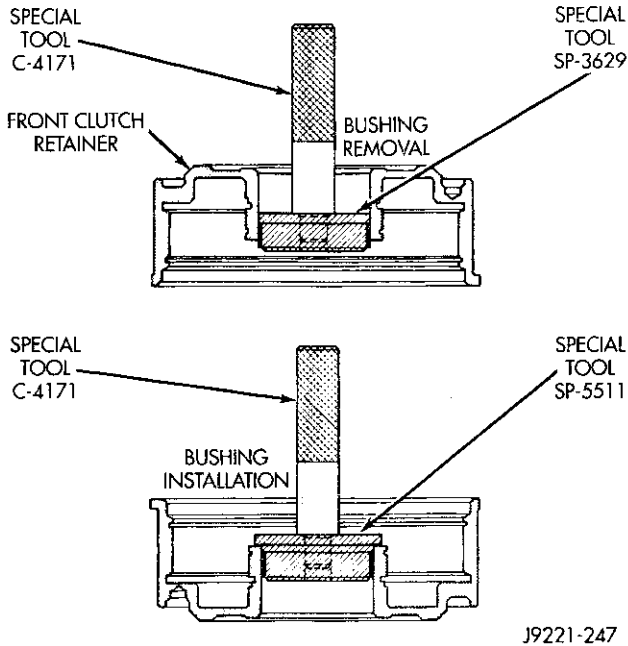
Front Clutch Retainer Bushing Replacement Tools
